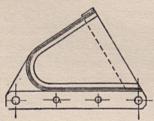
Crushed Coal ELEVATOR BUCKET.
